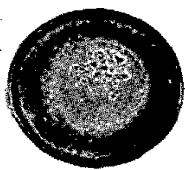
B. Small pitting damage to valve lifter (A) and camshaft (B)
